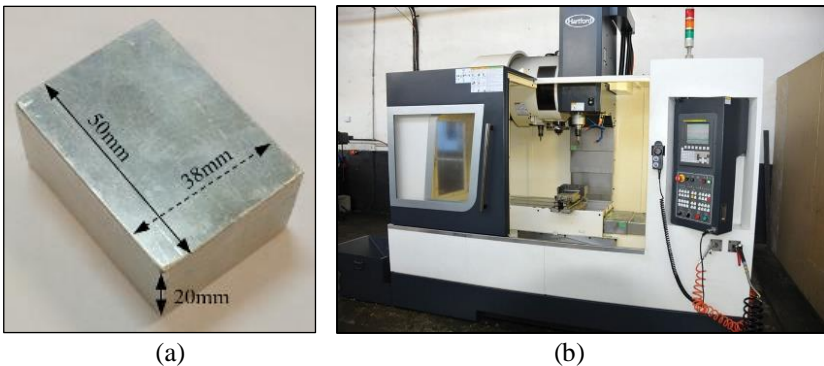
(a) Completed sample specimen of AA6061 for the experiment, (b) the Hartford LG-1000 of CNC machine
